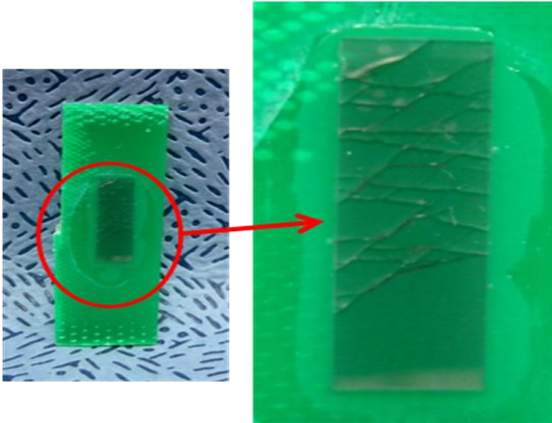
Occurred crack at SAW substrate on the PCB(FR-4)
